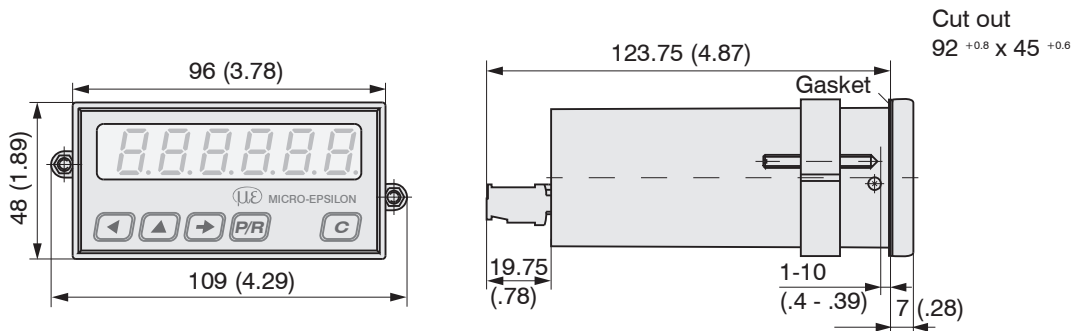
Dimensional drawing of display DD241PC, dimensions in mm, not to scale
